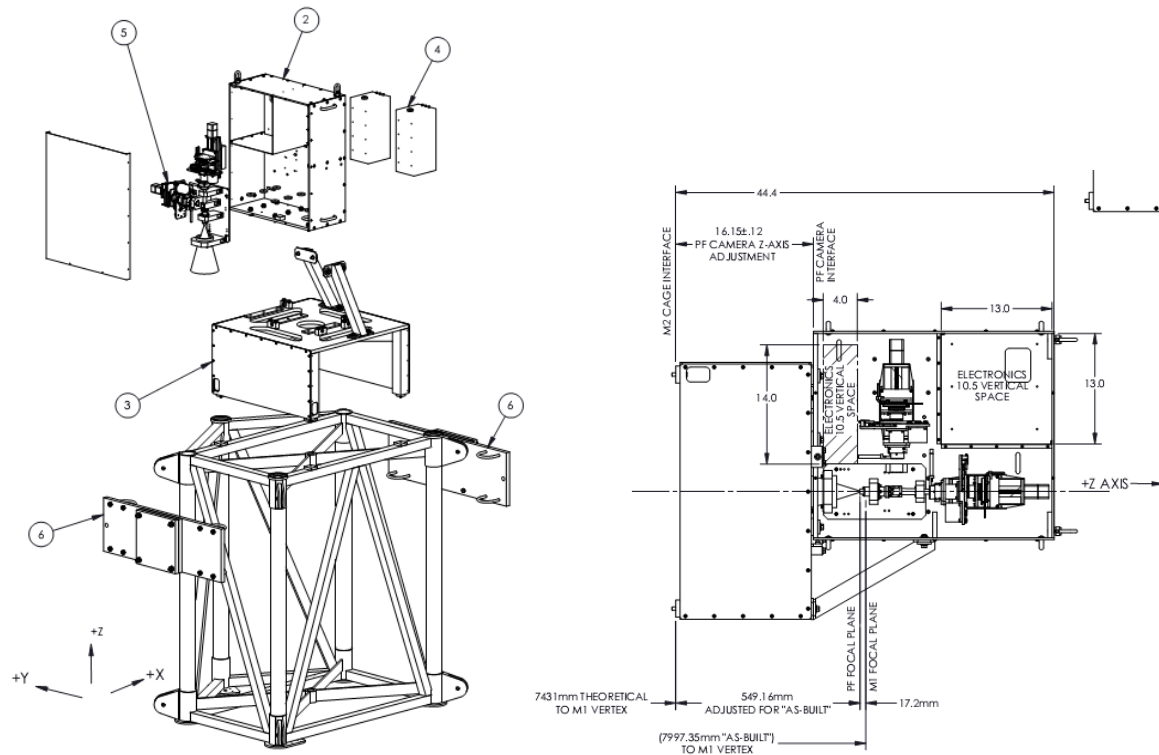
Prime Focus Test Assembly (PFTA) Mounted on M2 Cage
